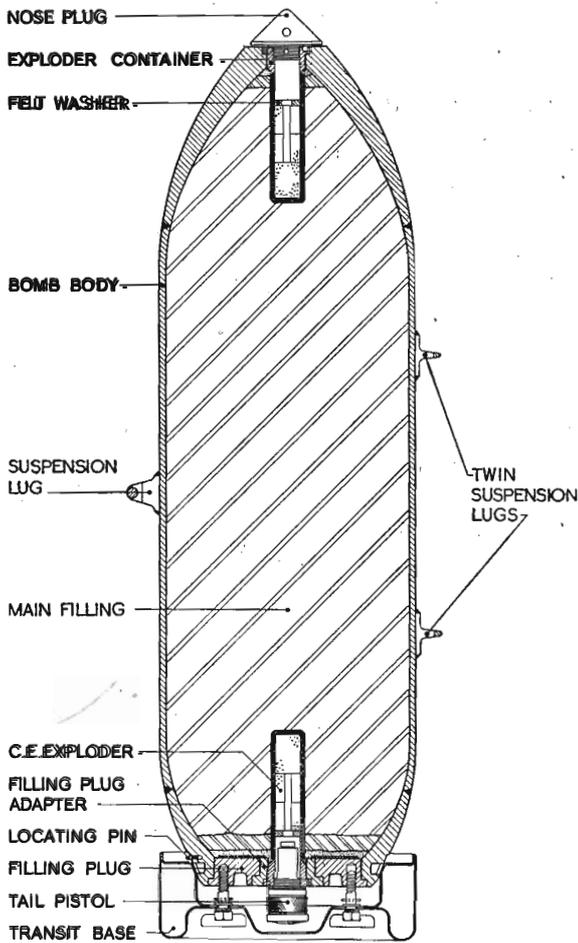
Sectional view of Mk. VI bomb fitted with No. 29 transit base and No. 36 nose plug
